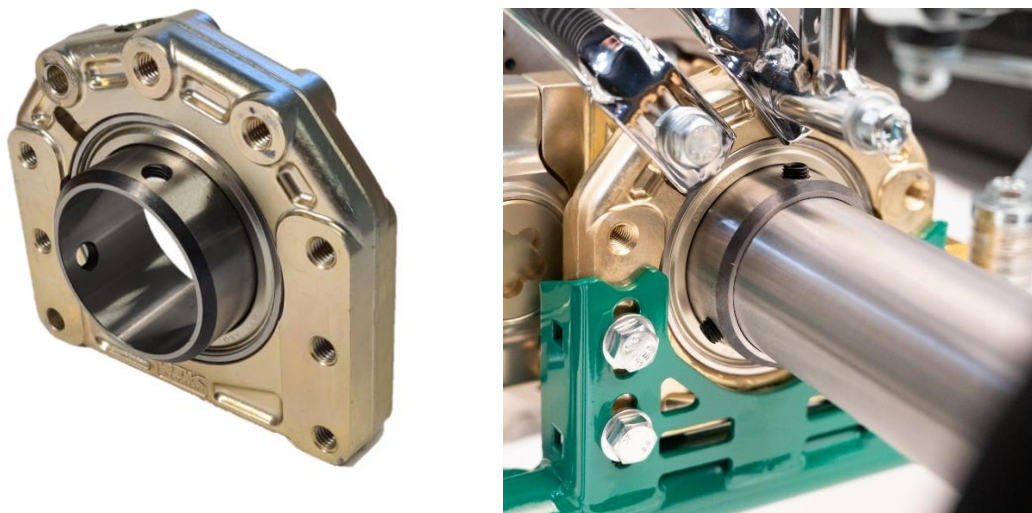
FORGED AXLE'S SUPPORT PLUS BEARING (LEFT) AND EXAMPLE OF MOUNTED SYSTEM ON THE CHASSIS (RIGHT).
